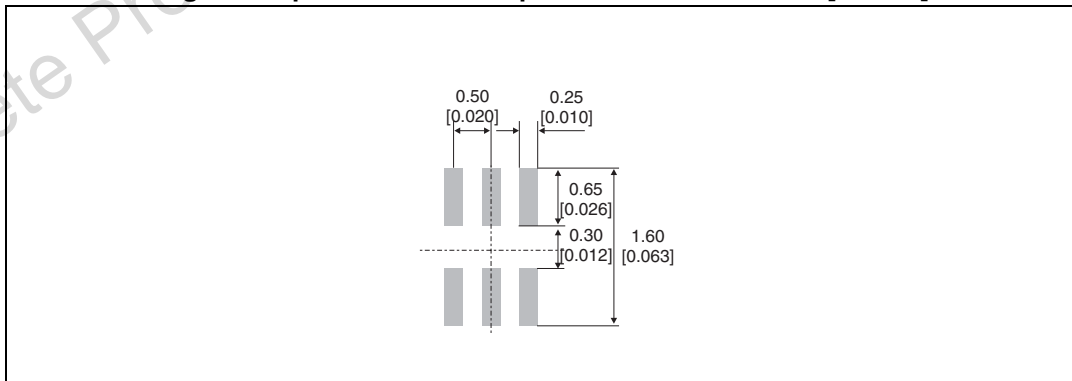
μQFN 6 leads footprint dimensions in mm [inches]
